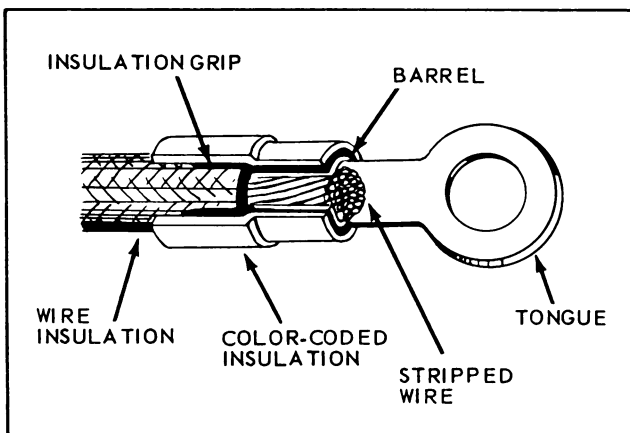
Pre-Insulated Terminal Lug - Cutaway
